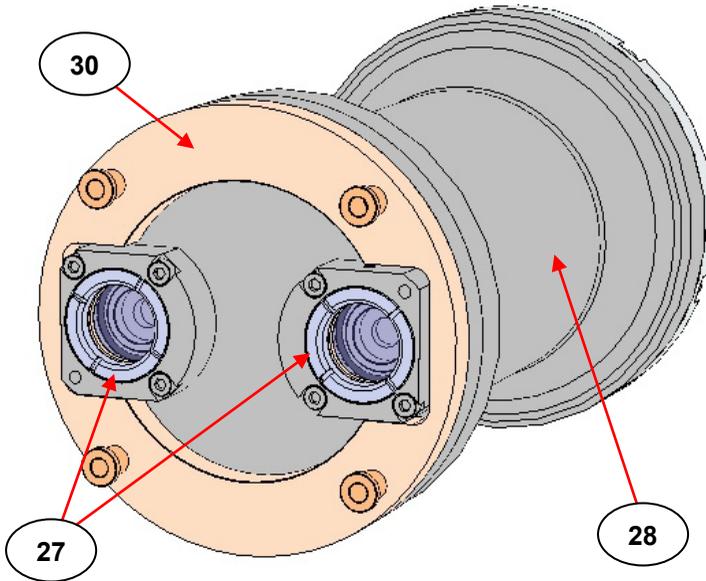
Transfer Mirrors Carriage Frame Assembly (25) removed from the Top Section (24) and Gas Cell Body Assembly (28)
